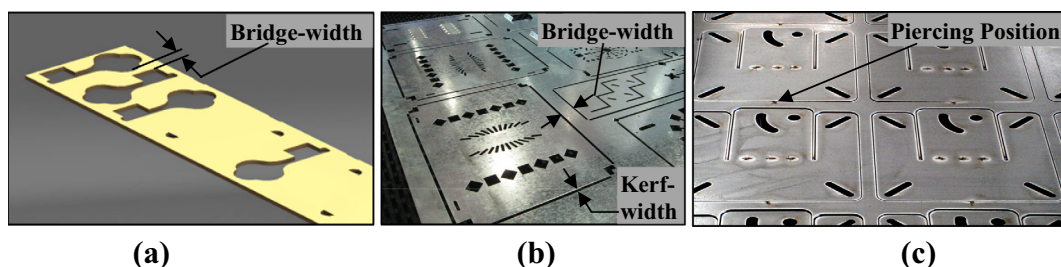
Different geometrical shaped parts produced with (a) blanking, (b) profile blanking, and (c) laser cutting processes.
